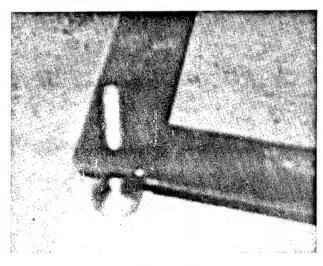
P.I.A. Leveler Installation on Corner of Base Frame,
